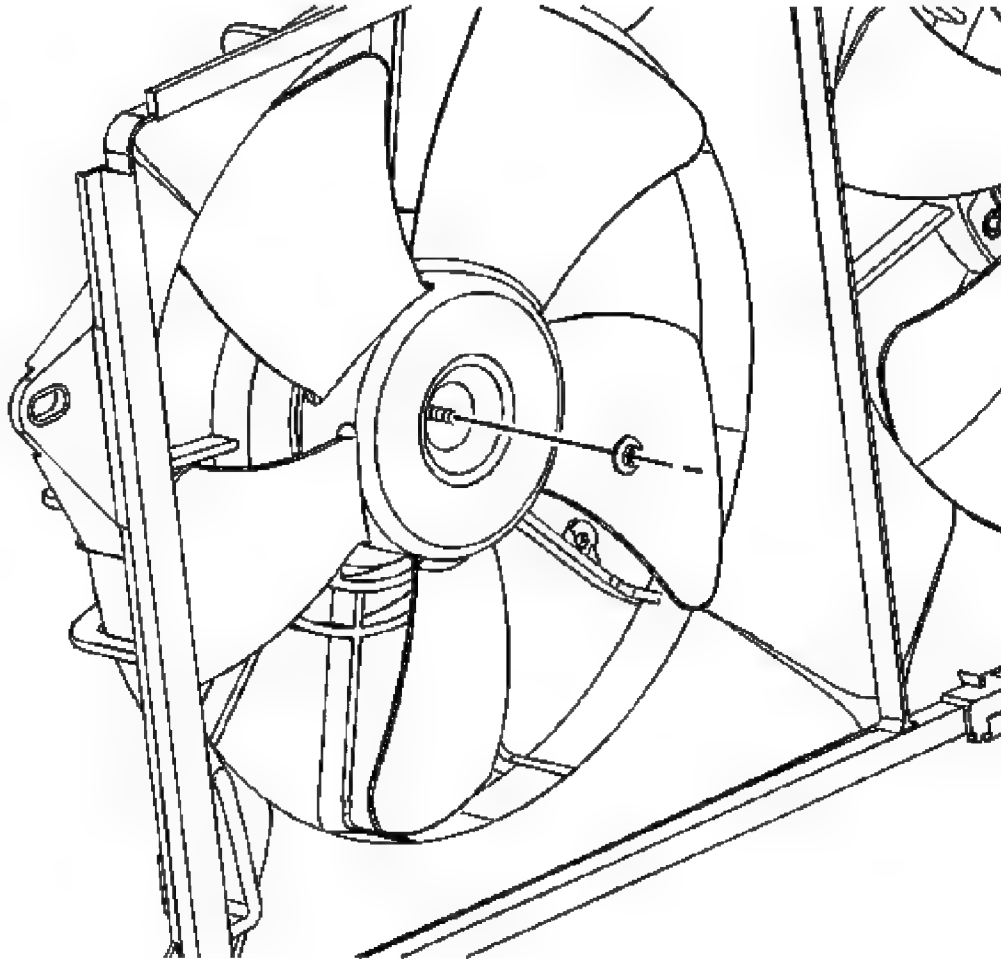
Identifying Cooling Fan Blade Retaining Nut
